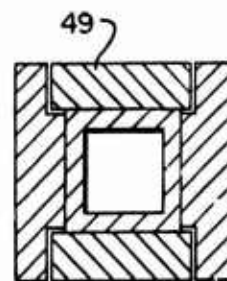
Cross Section a-a of Clamp-On Assembly.
